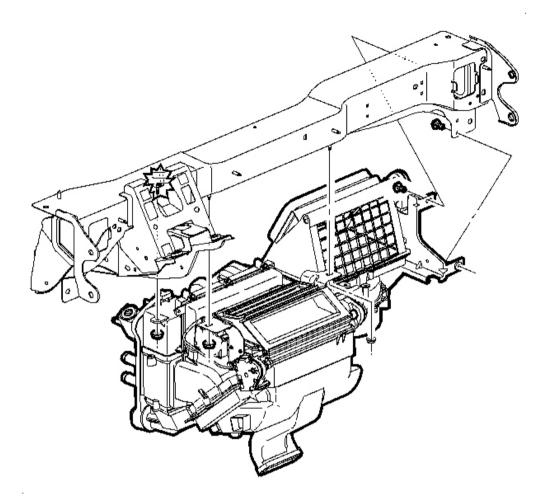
HVAC Module Seal & Nuts Courtesy of GENERAL MOTORS CORP.
